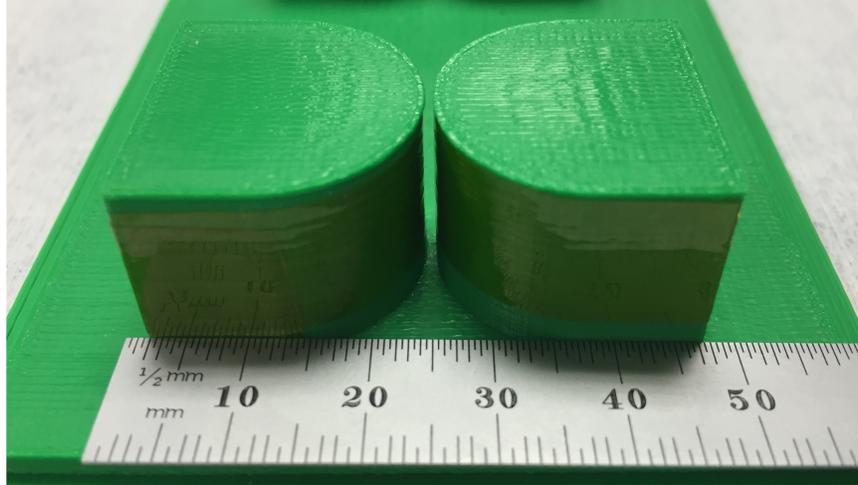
Bending fatigue test fixture with D blocks having radii of 12.5 mm.
